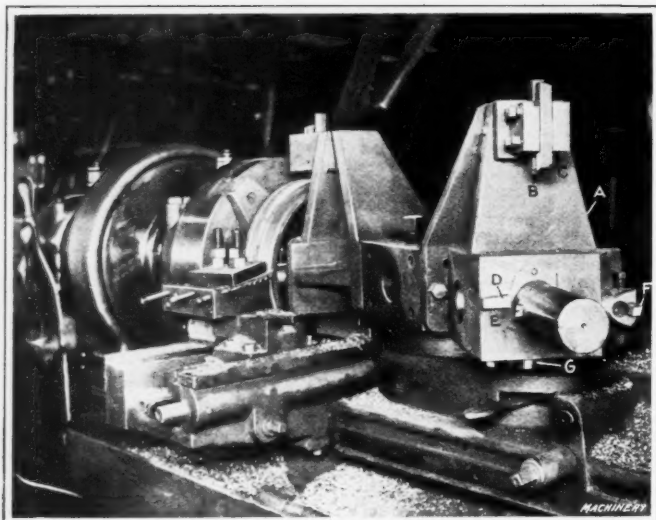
No. 6 Potter & Johnston "Automatic" tooled up for turning and boring at One Setting All Surfaces on Flywheels except Crankshaft Flange Fit
